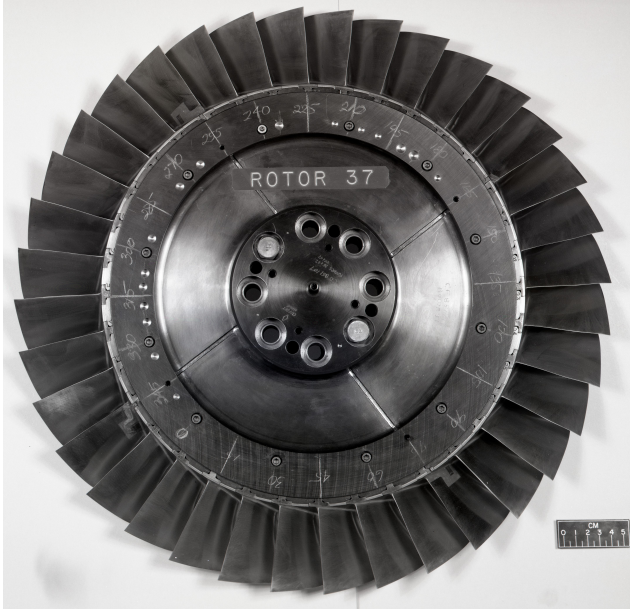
Rear view of the NASA Rotor 37 experimental rotor [22]
